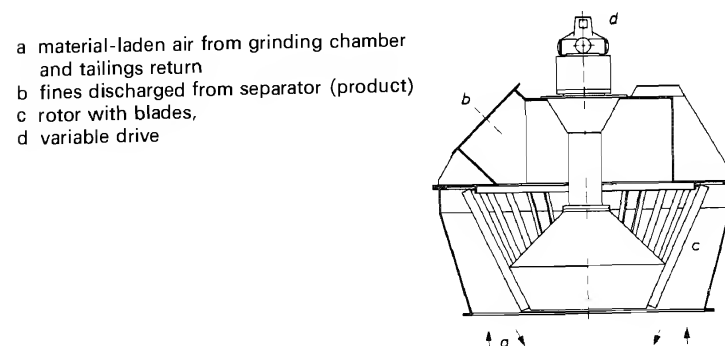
Bladed rotor separator, with drive, as mounted over roller mills (Loesche GmbH)
